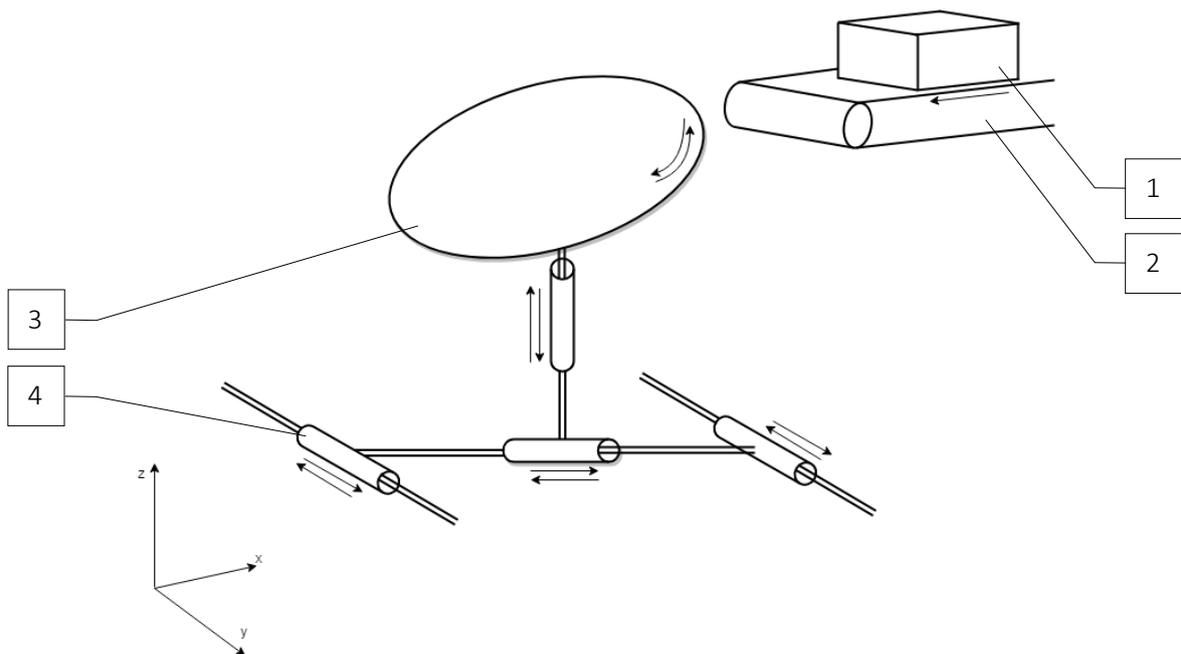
Scheme of suggested delivery system with a conveyor (on the right) and a 3-axis platform (in centre). 1 – Cargo box; 2 – Conveyor between a user and the drone; 3 – landing platform for drone; 4 – motors installed on shafts.
